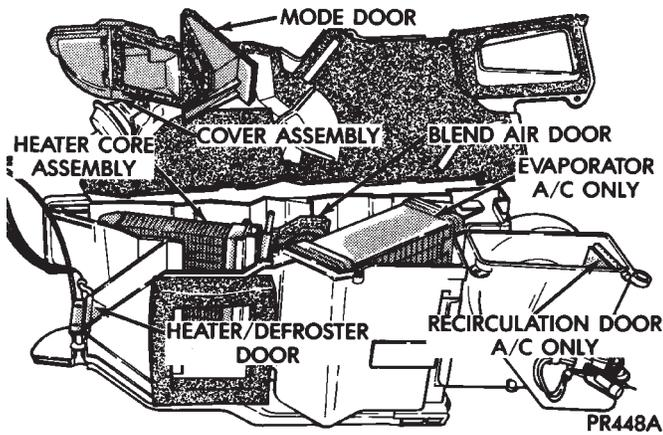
Heater-A/C Unit Cover Removal and Installation
